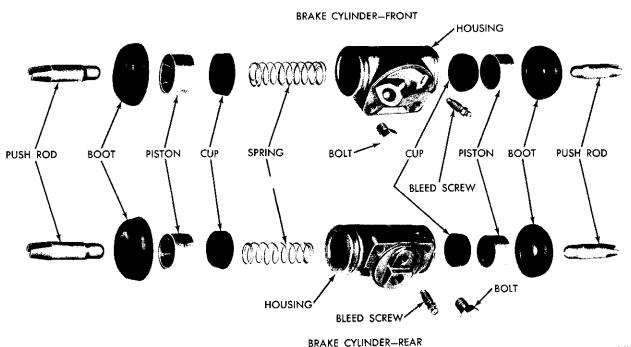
Wheel Cylinder Assembly (Front and Rear)
